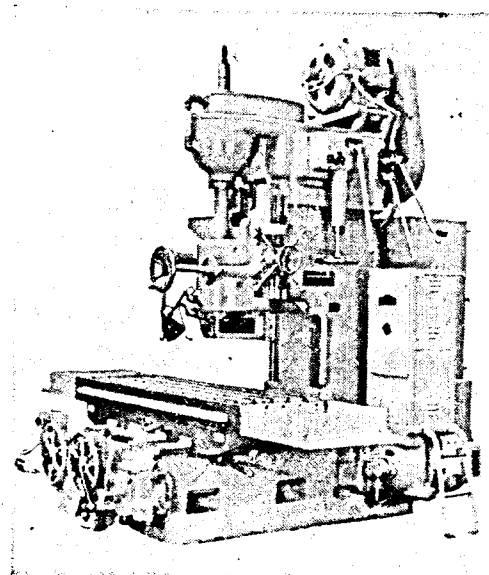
Herbert No. 28A Vertical Milling Machine, a powerful machine for the heaviest classes of milling including negative rake carbide milling. Capacity: 62"×29"×30½"
